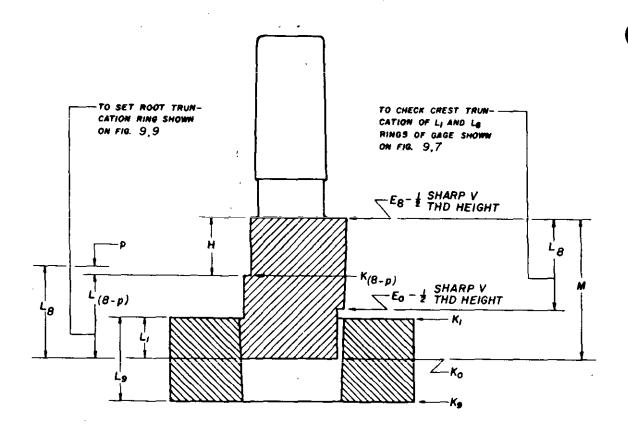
Master setting plug and ring gages for setting pitch diameters of threaded plug and ring gages for NGT, NGT(Cl) and SGT.
